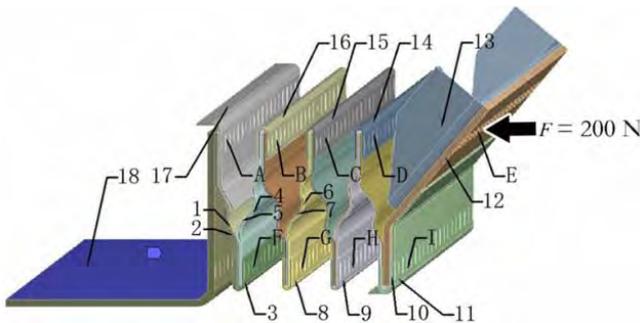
FIGURE III. POSITION OF SPOT WELD AND DIRECTION OF THE LOAD
